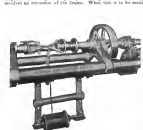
WRAPPING WIRE ON WIRE CABLE
